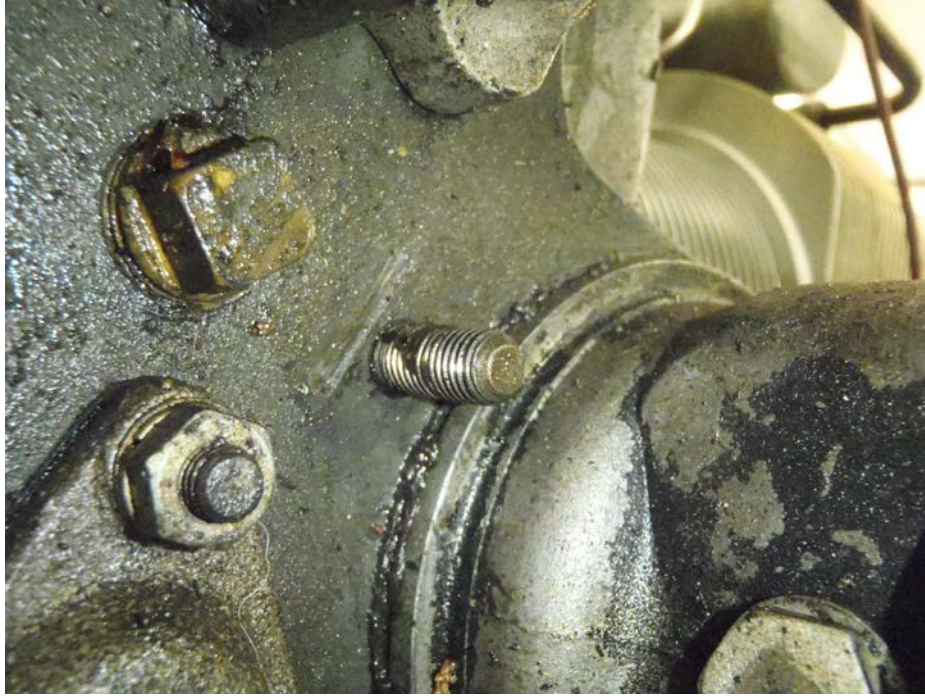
Front Engine - Right Magneto with Left Clip Removed
